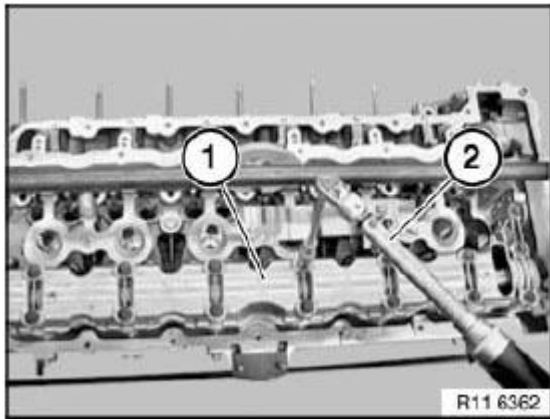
Lifting Lower And Upper Bearing Strips With Camshaft
